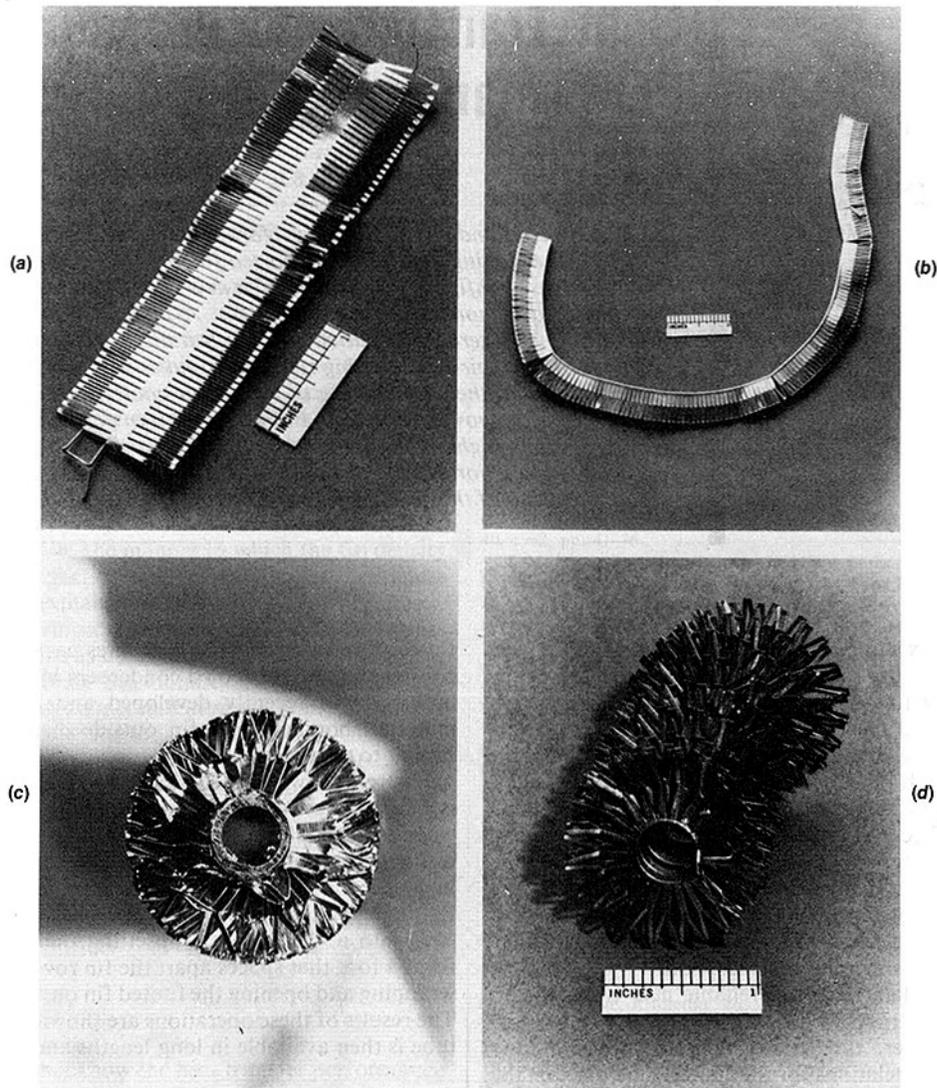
Steps in the fabrication of K-Y finned tubes: (a) aluminum strip is rotary lanced; (b) lanced strip is folded and foot is formed; (c) footed strip is wrapped on an epoxy coated tube; (d) free standing fins removed from tube
